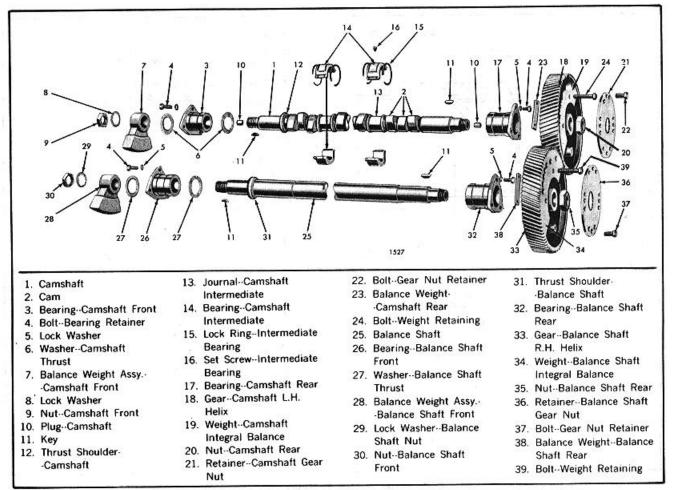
Typical Camshaft and Balance Shaft Details and Relative Location of Parts
